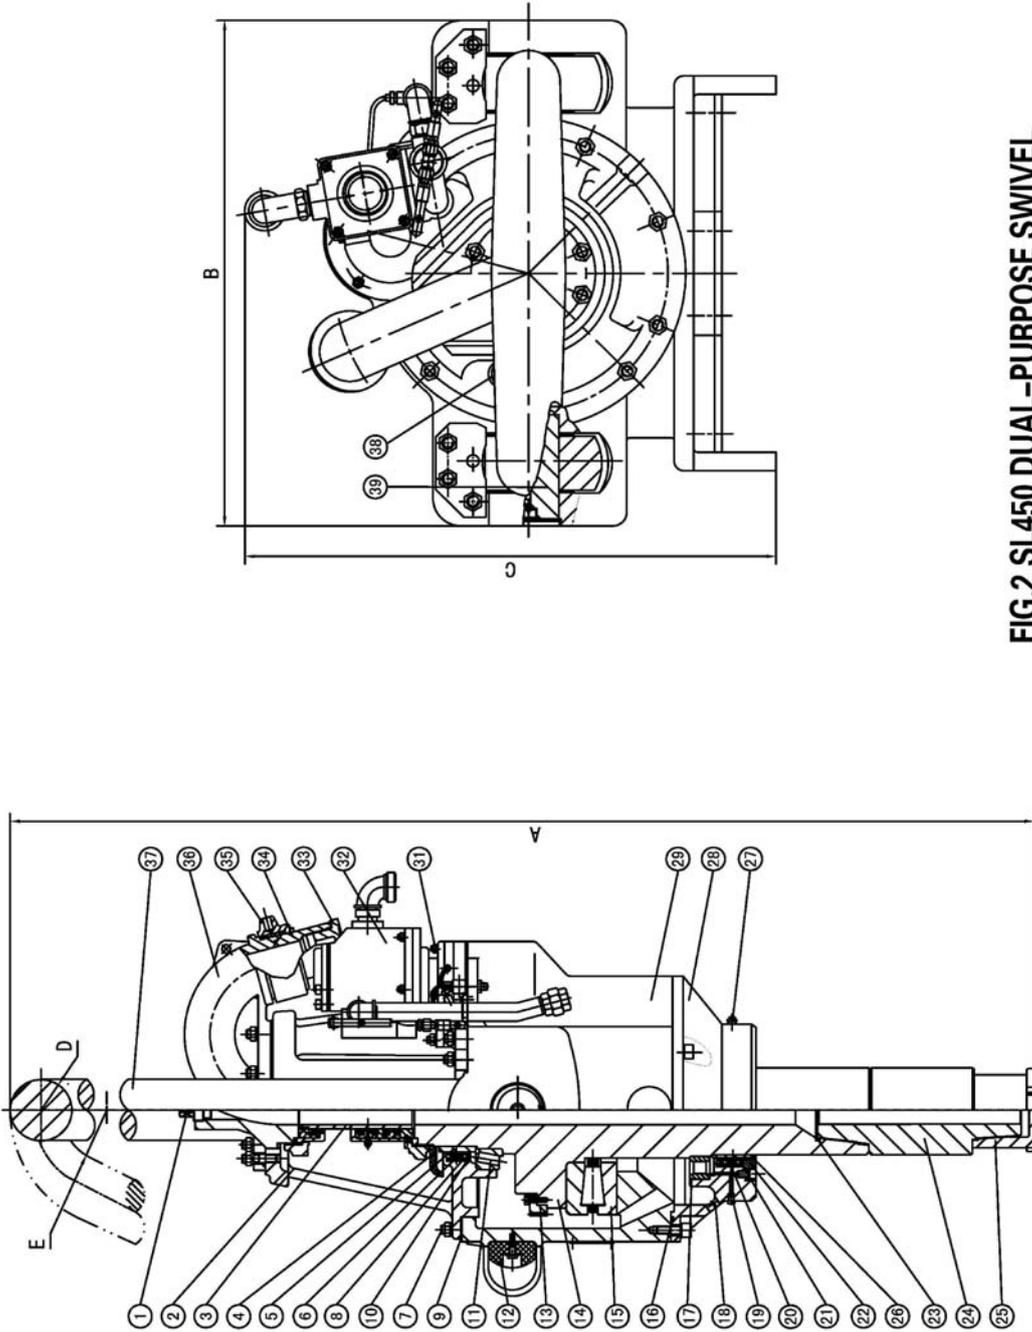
SL450 DUAL-PURPOSE SWIVEL
